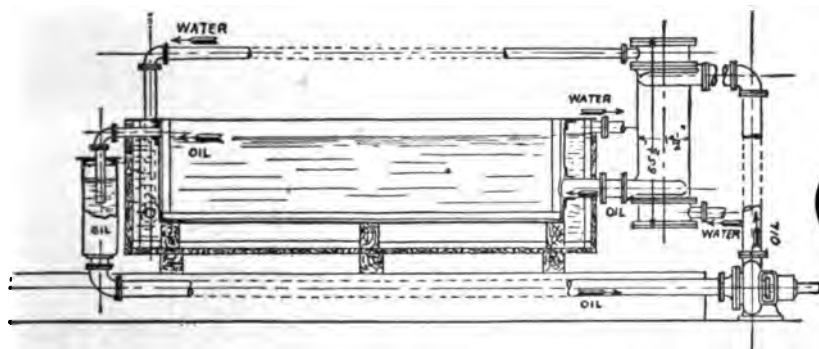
SEC. 8a.—Method of cooling quenching tank oil with oil cooler.
